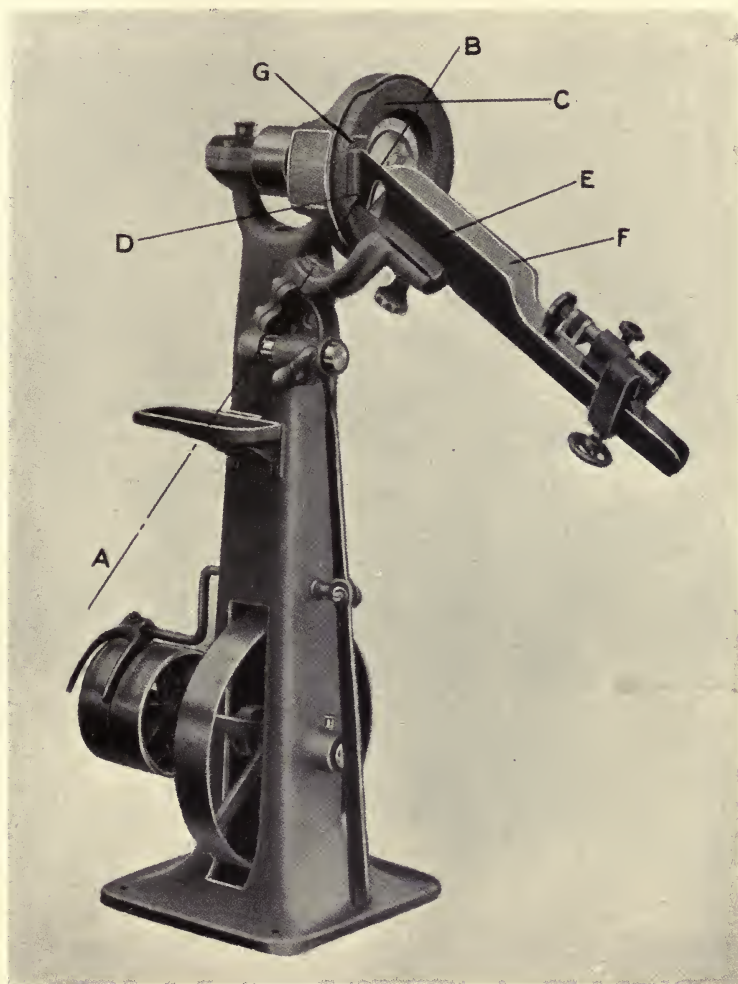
'YANKEE' TWIST DRILL GRINDER
